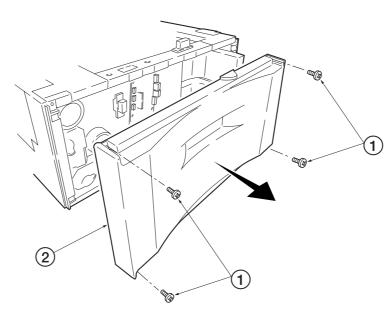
Removing the rear cover (500-sheet cassette paper feeder)
